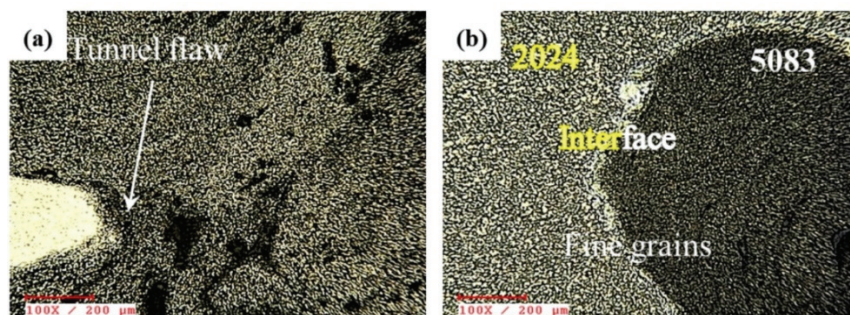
a) Tunnel flaws defect in fabricated sample; b) material flow in the weld zone.
